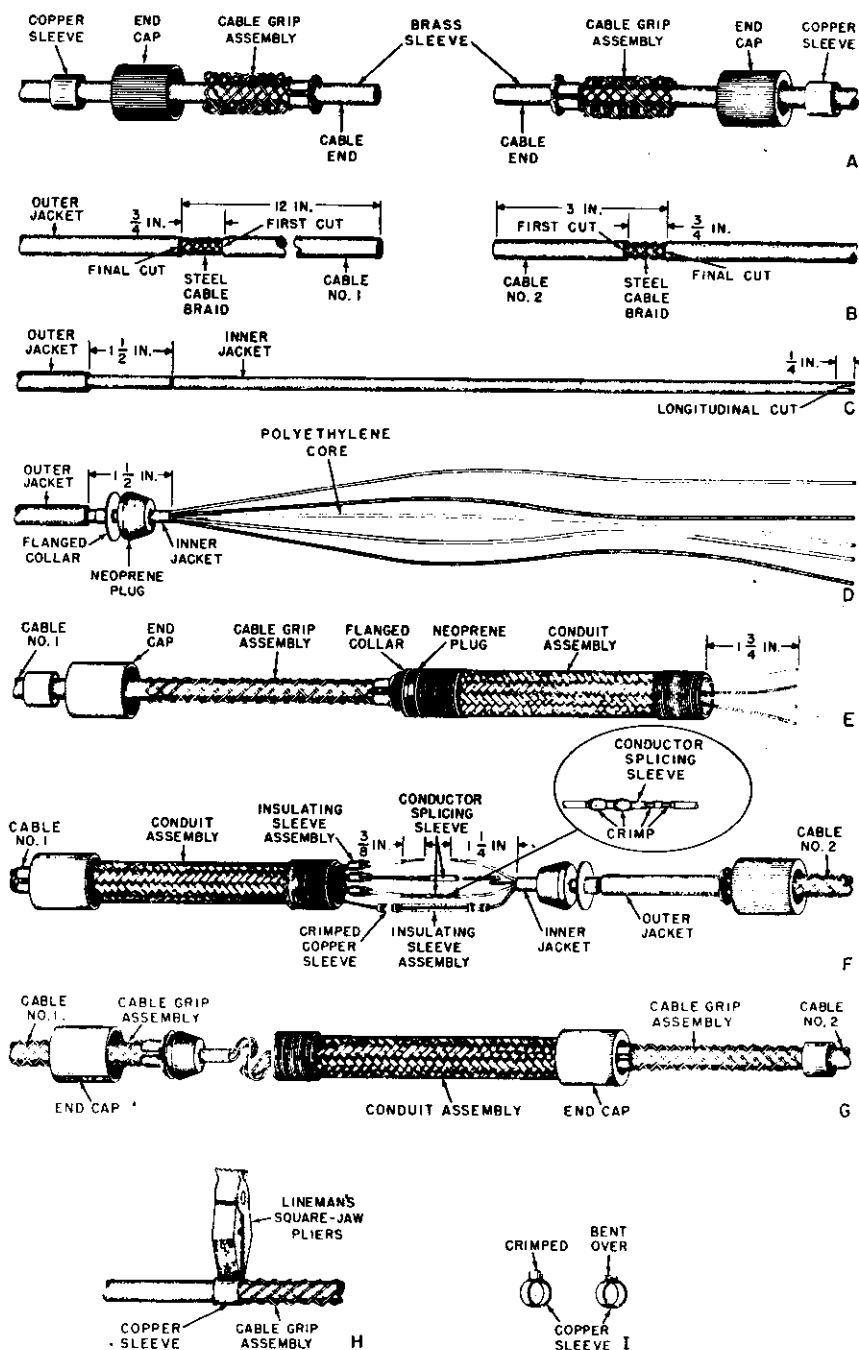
Field Splice of CX-1065/G Cable Assembly
